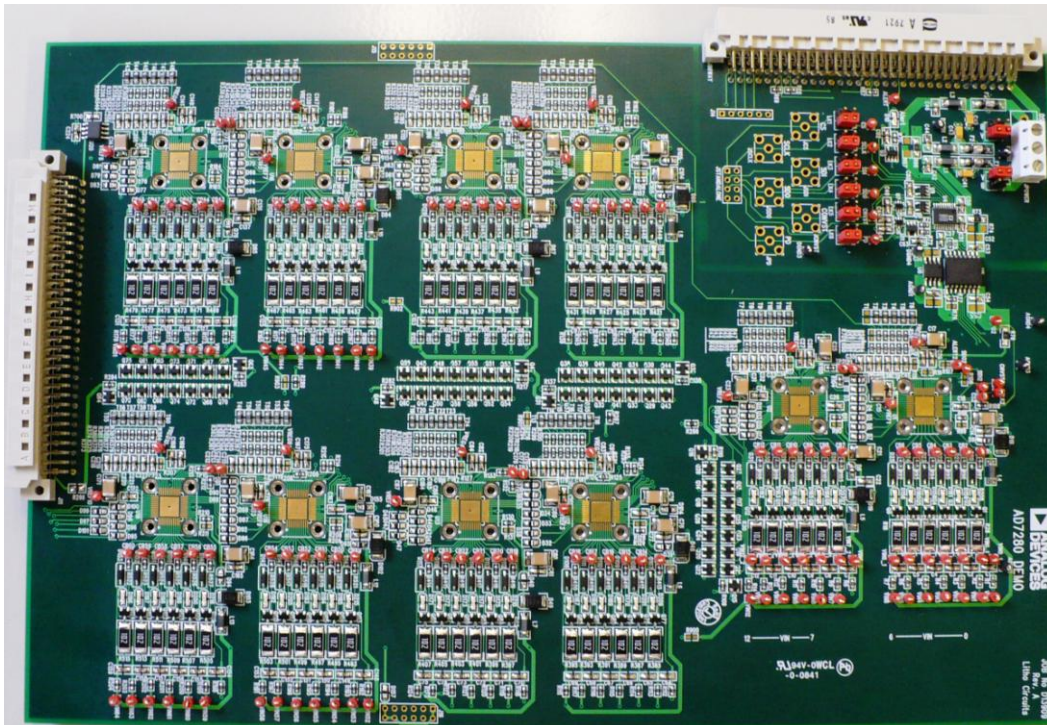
A picture of the DEMO board without any chips inserted into the clamps.
